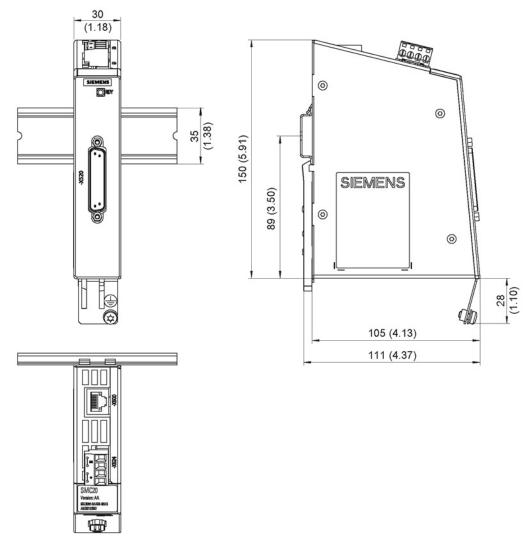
Dimension drawing of the Sensor Module Cabinet SMC20, all data in mm and (inches)
